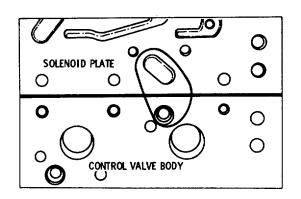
Inspection for Battering of the Solenoid Plate and Control Valve Body.
